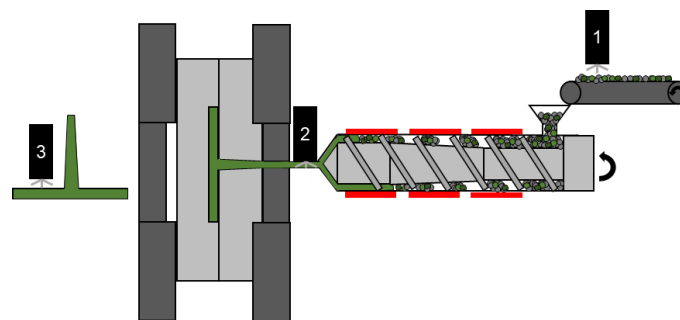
Potential application of inline color measurement sensors in the injection molding machine
